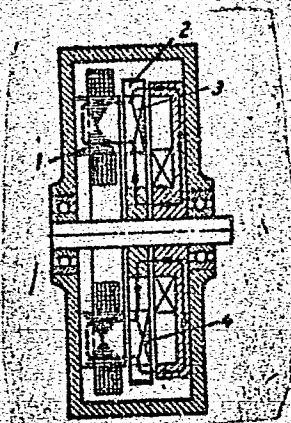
1- stator; 2- outer star wheel; 3- inner star wheel; 4- filling of nonmagnetic material
